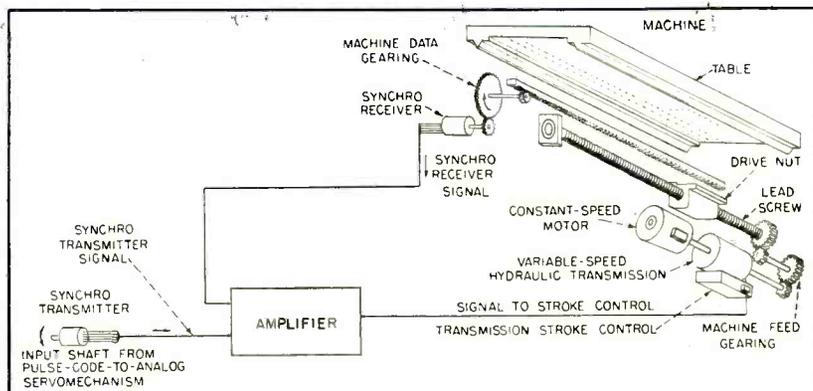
Power servomechanism controlling table motion consists of synchrocontrolled hydraulic rotary transmission driving lead screw. Identical units control head and cross slide
